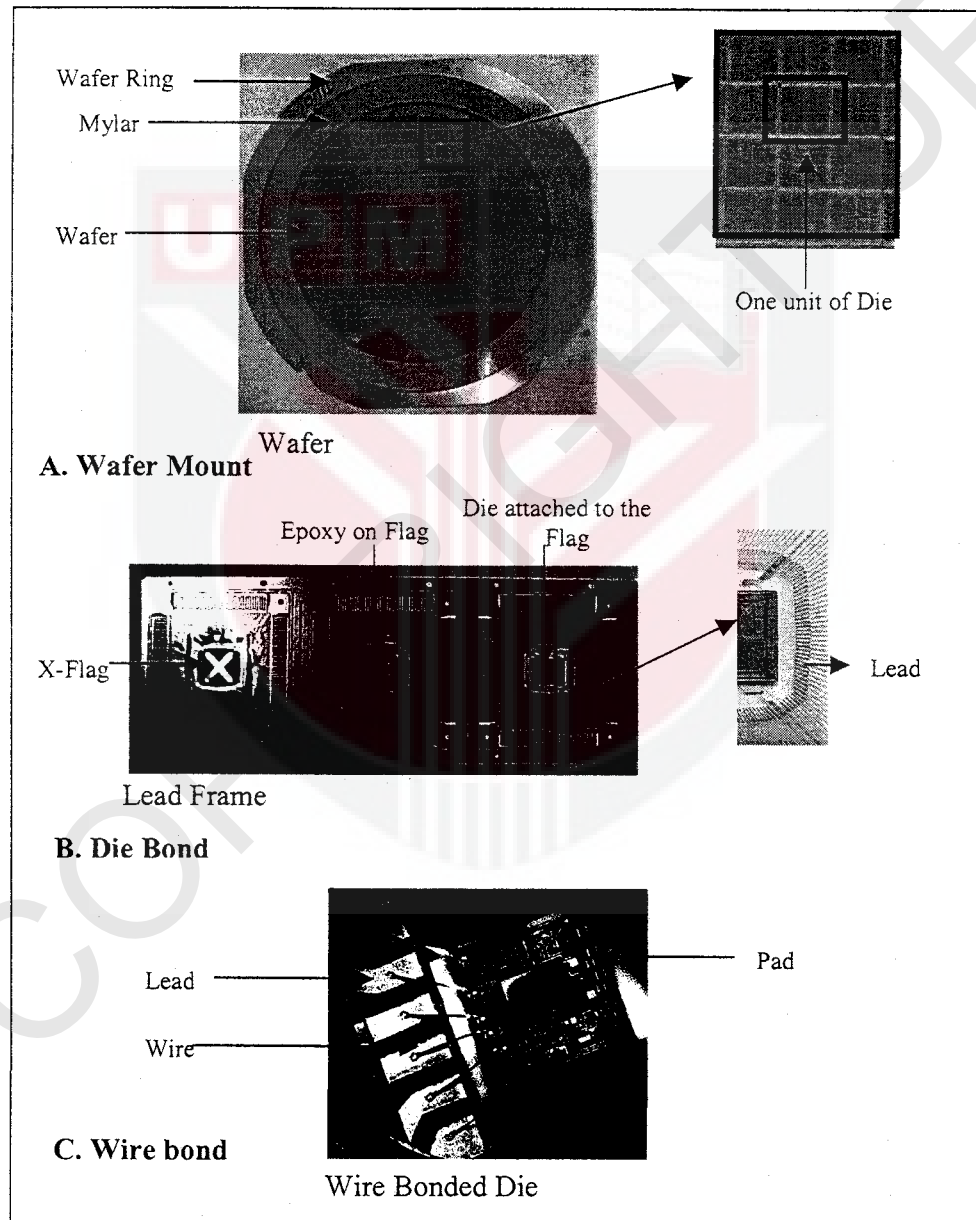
Basic Step in Front End Assembly: A. Wafer Mount, B. Die Bond, C. Wire bond.
